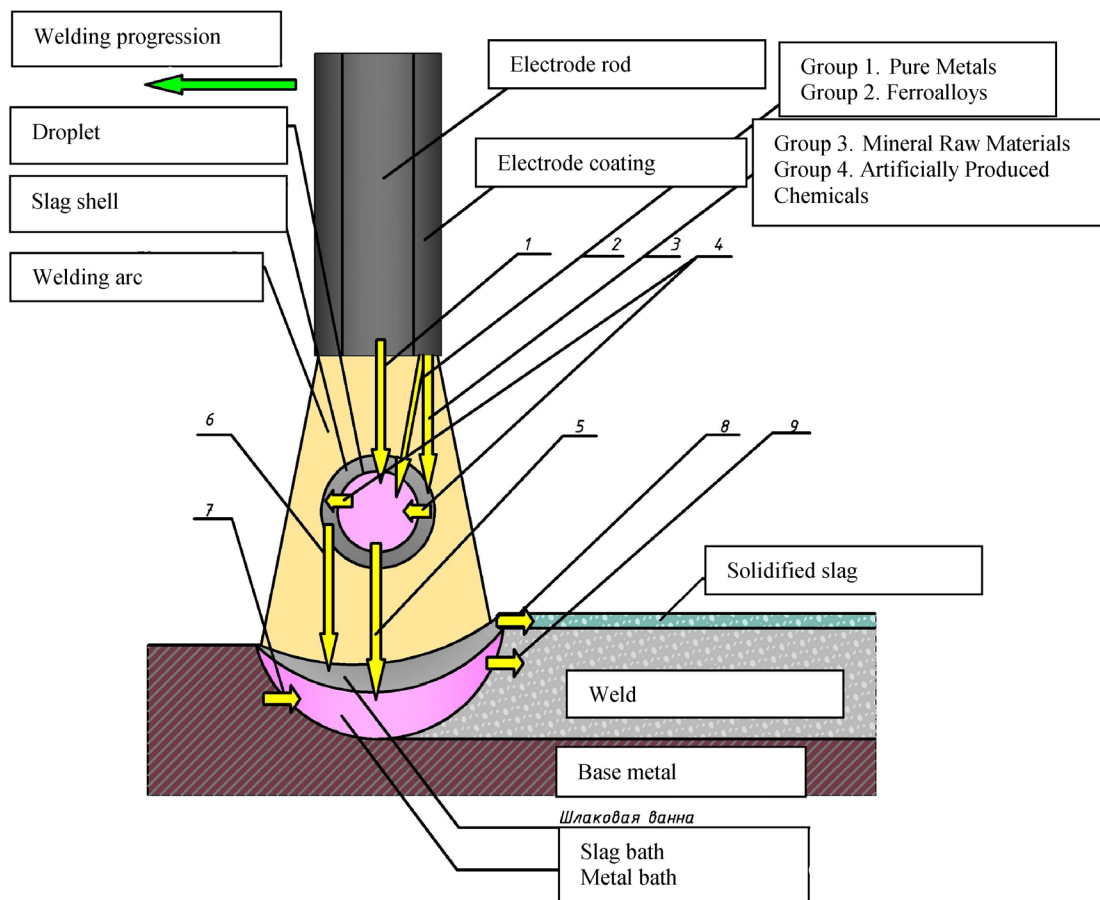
Physical simulation of the process of the weld metal cast structure formation during manual arc welding
